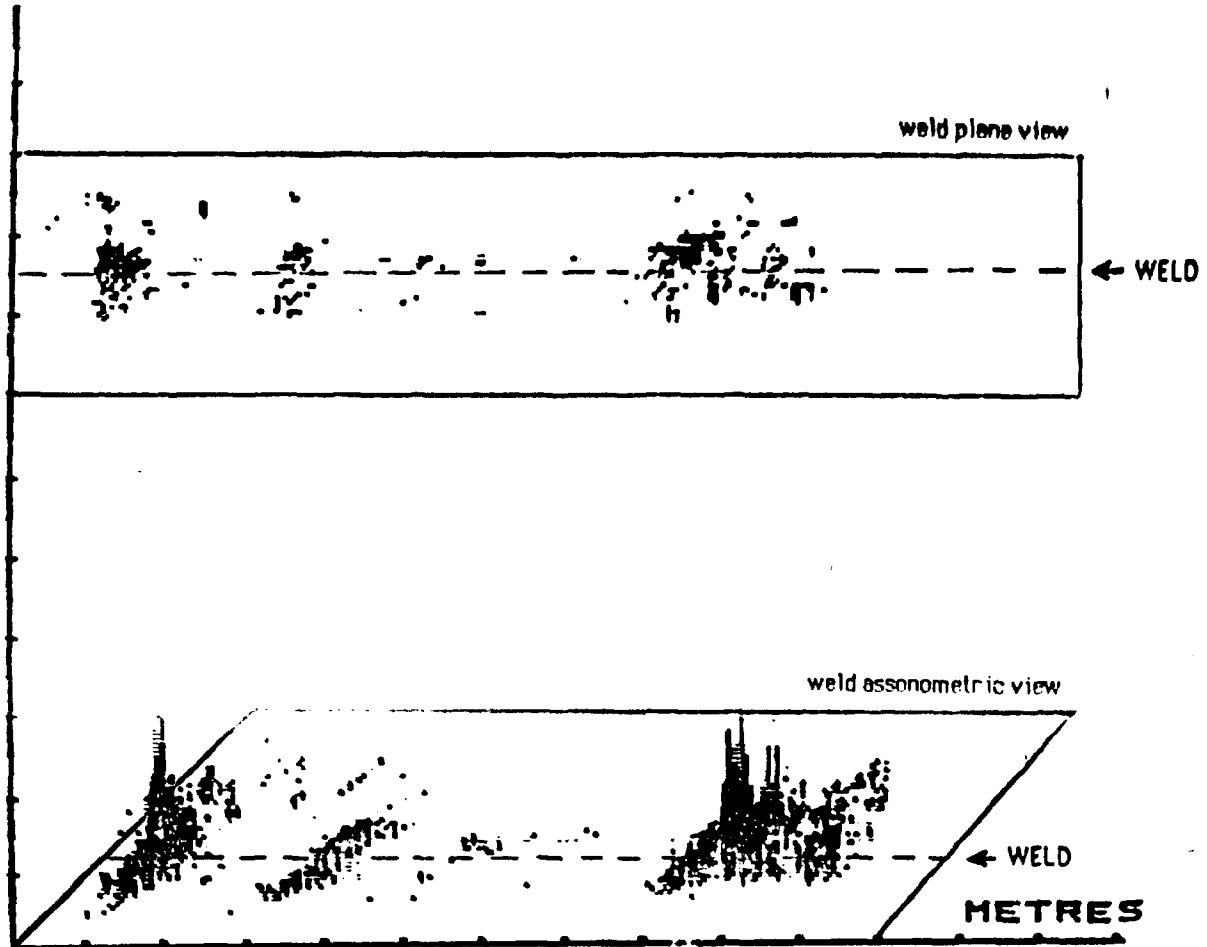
Location map of AE sources located in a weld containing real cracks.
